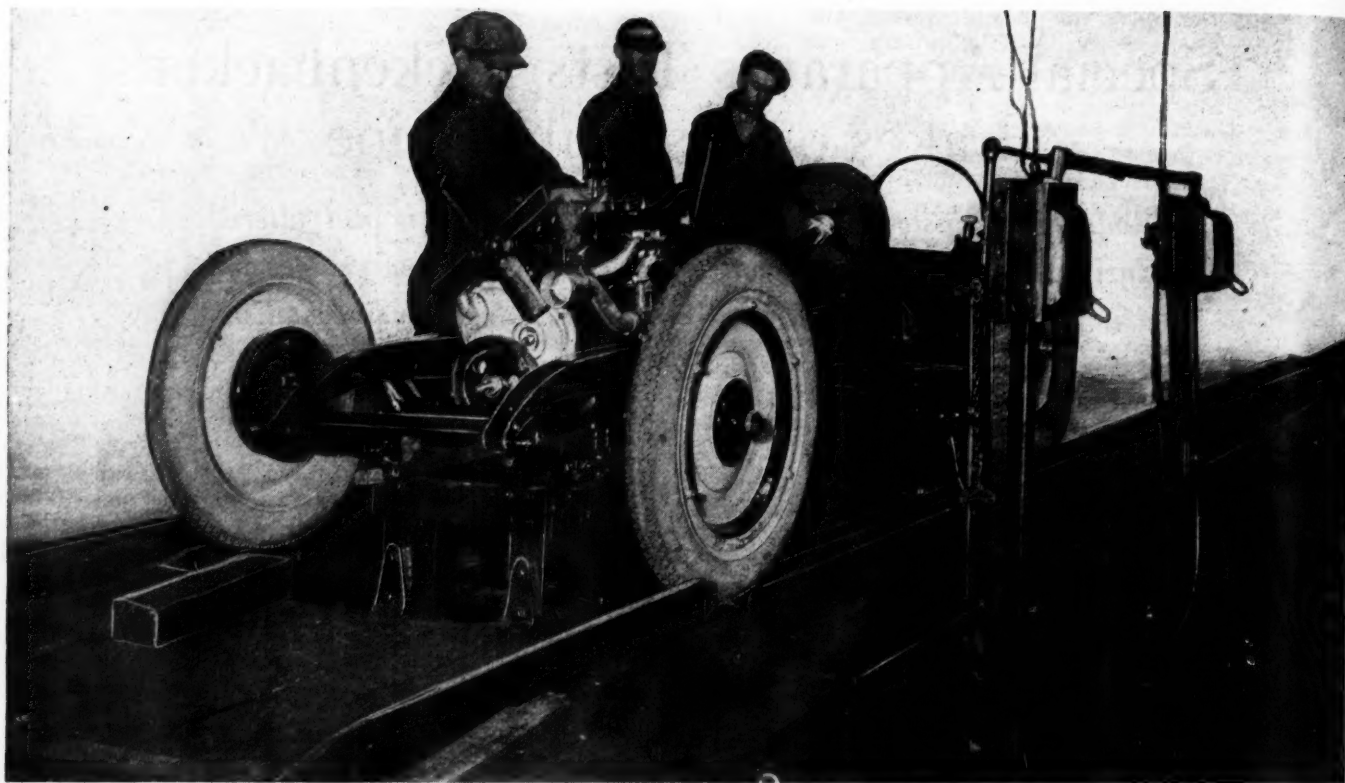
Chassis in place with wheels in contact with drums. Details of front axle lifting head are shown in foreground
